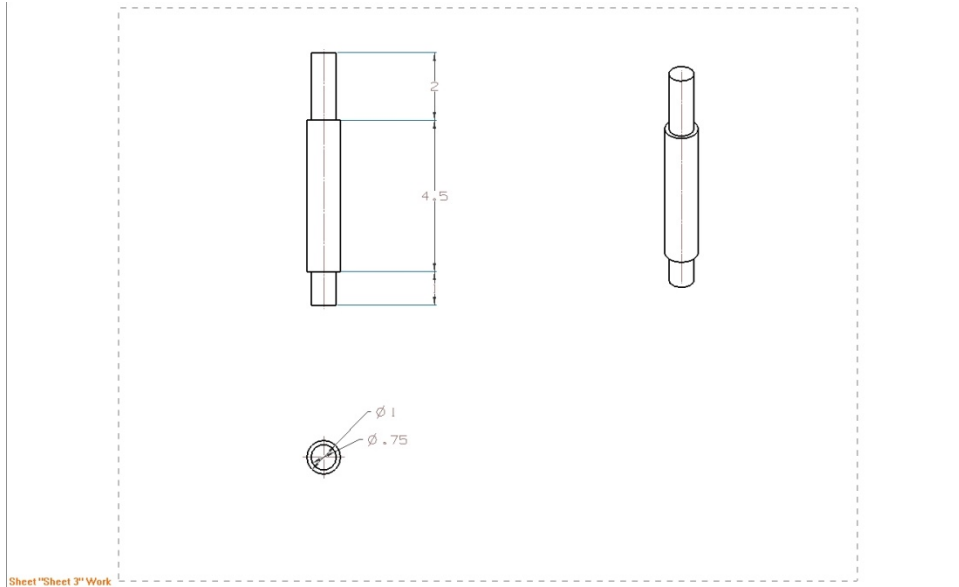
Pendulum Control Wheel Vertical Mounting Shaft
